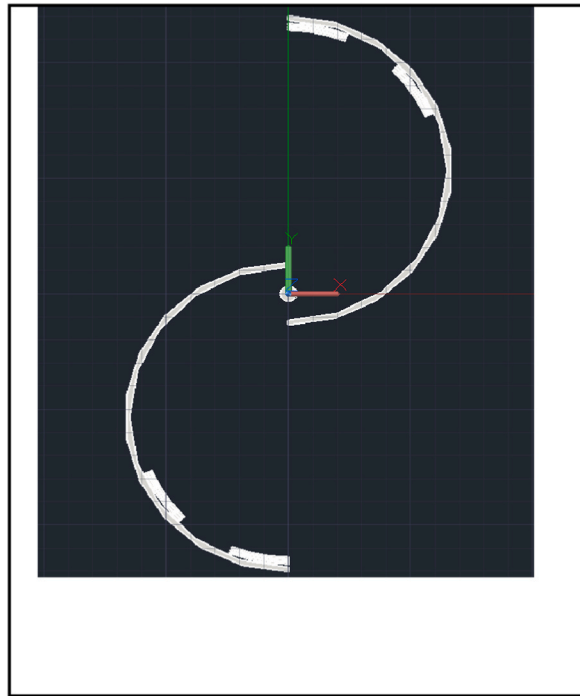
2D view for the modified design with two sets of three mini blades.
